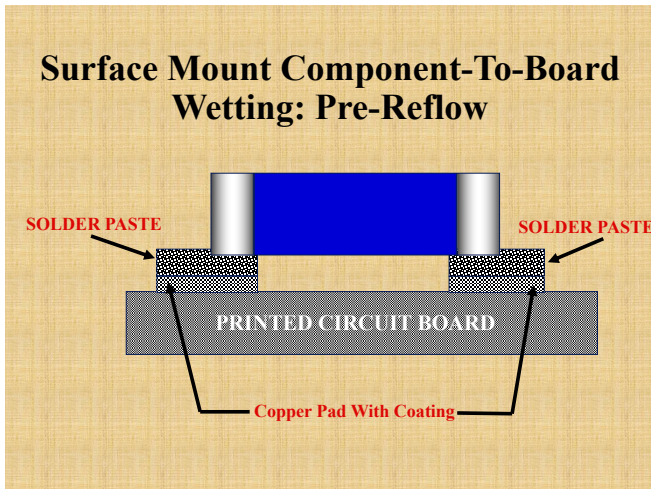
Surface Mount Devices Placed in Solder Paste Before Reflow
